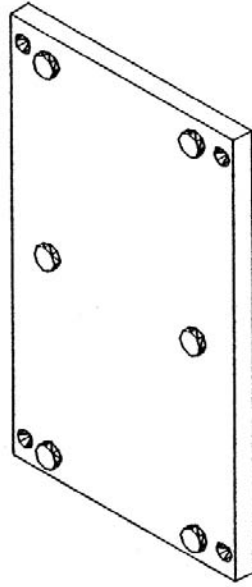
Isometric view of the rear ejector plate from the clamp direction.
